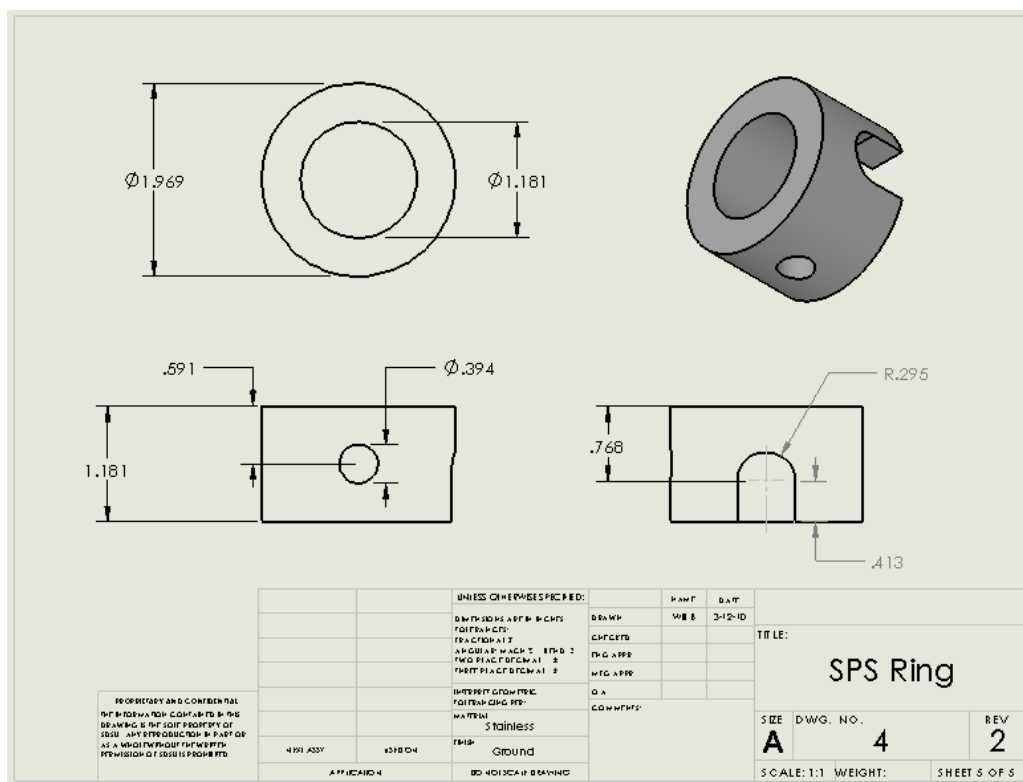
A diagram of the steel ring that will hold the graphite SPS extrusion fixture during the sintering process.
